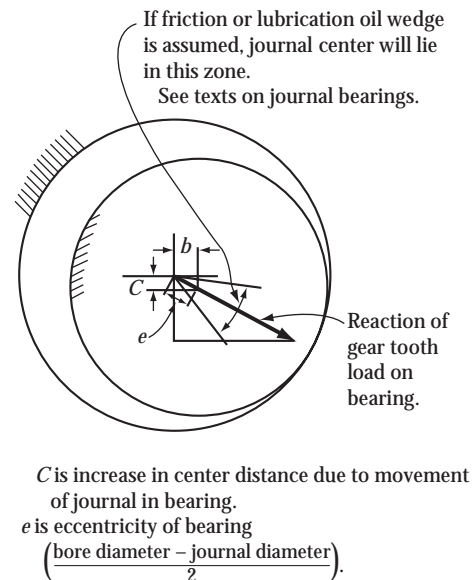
The position occupied by the journal in a bearing is a function of the gear tooth loads along the shaft and the effects of the friction or of the oil wedge in the bearing.
